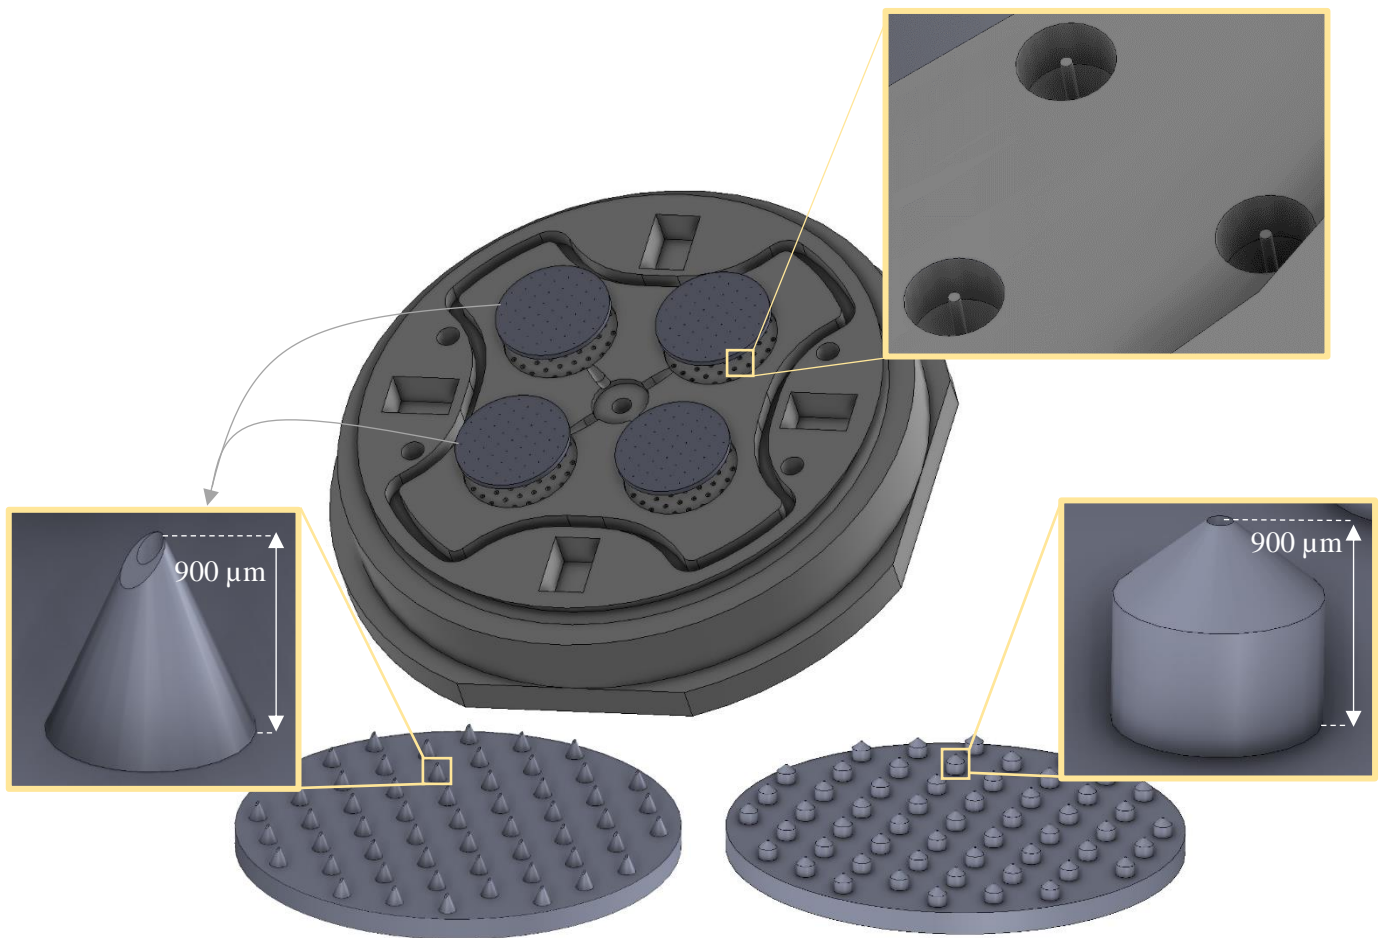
CAD file of the injection mold and associated hollow MN array to obtain
